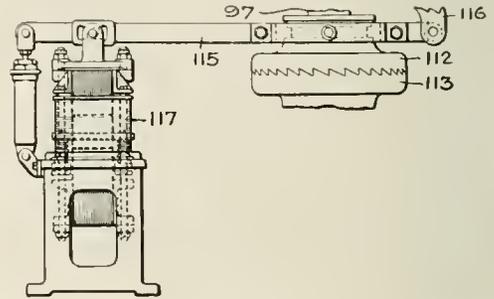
Clutch Operating Mechanism for Slow-Speed Winding
